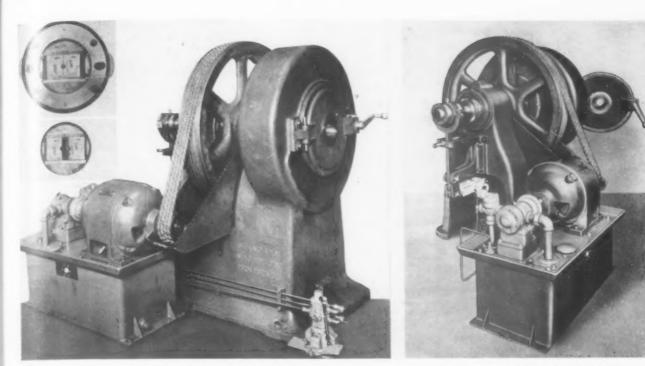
shows front and rear views, respectively, of the swaging machine (by Standard Machinery Company, Providence, R. 1.) developed for swaging bulbous shapes such as shown in Figs. 7, 8 and 9. Wedges, operated by the mechanism shown at rear of machine, and shown in the insets, close and open the dies to permit entry and withdrawal of the larger diameters.
